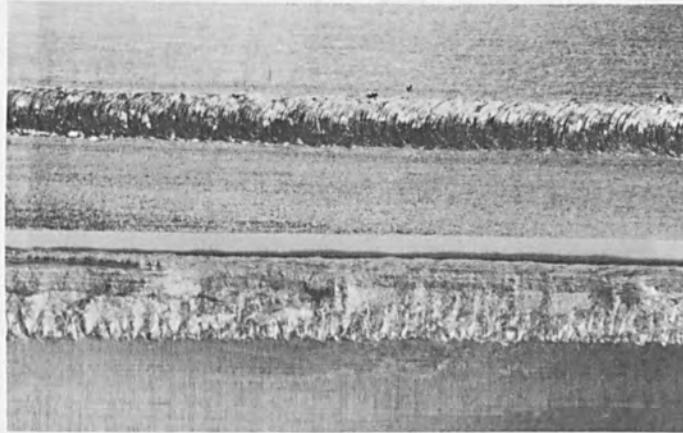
Surface and Fracture Appearance of Weld Made In Aluminum Alloy Type 1100.
